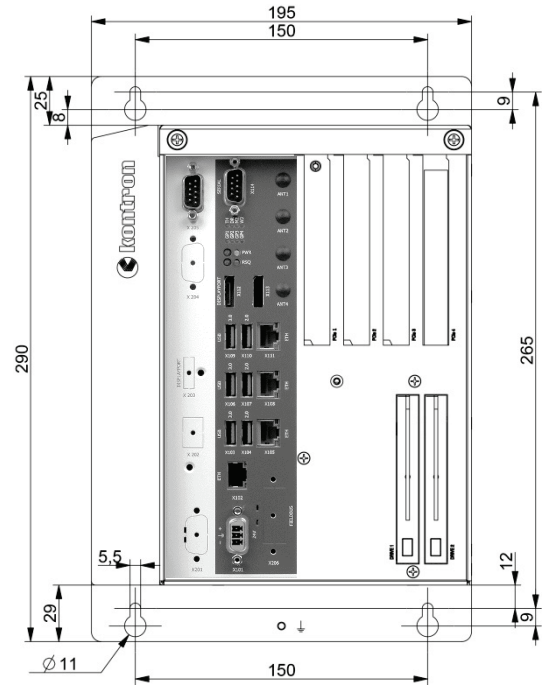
Dimensions: detail key hole (KBox C-104-TGL-4)
